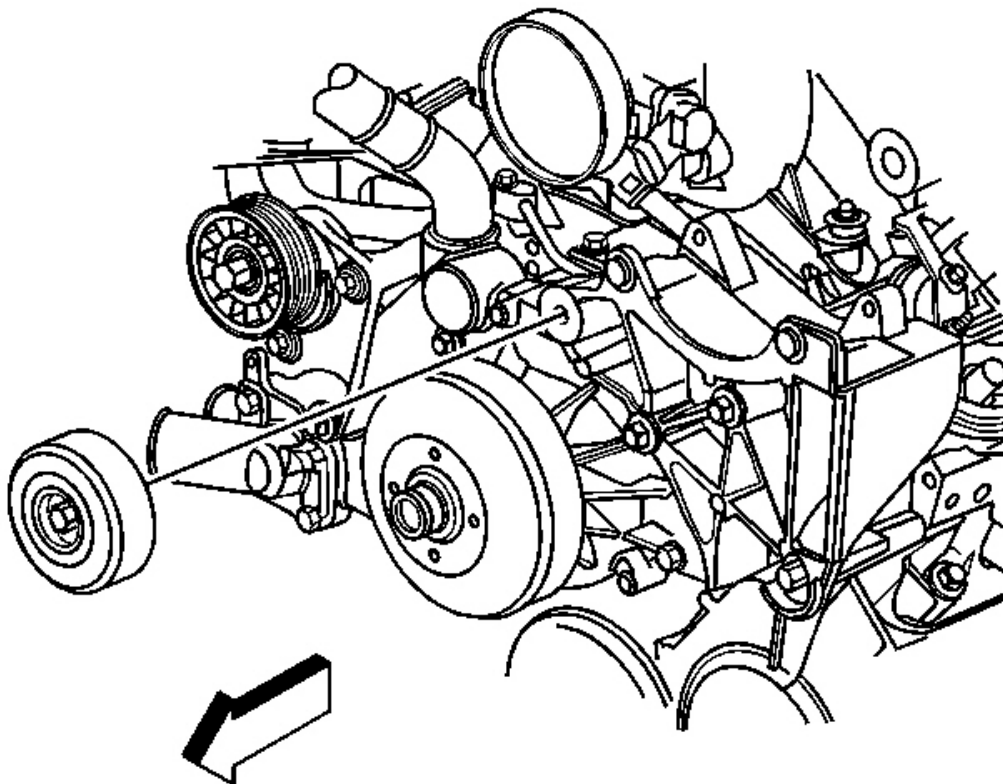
View Of Accessory Drive Belt Idler Pulley
